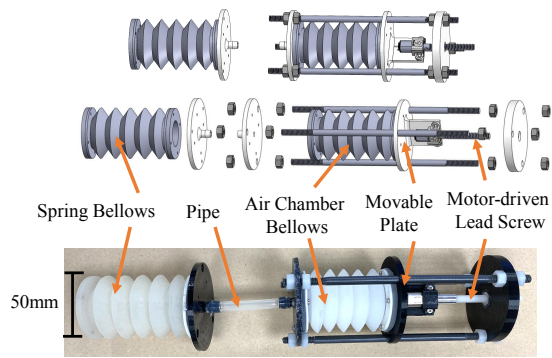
Dual-bellows actuator design. Top: Assembled actuator. Middle: Exploded view with parts labeled. Bottom: Actuator prototype.
